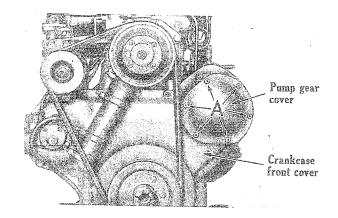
D. Cap Screws Holding Pump Gear Cover to Crankcase Front Cover (UD-16 Eng.)
